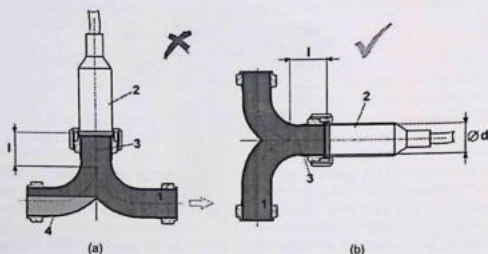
Incorrect mounting of sensors (2) in process lines (1) may give rise to tees with closed ends (3) that if too long will result in large dead areas. (a) But a swept tee if mounted in a horizontal pipeline may impede drainage (4). (b) Swept tees should be mounted in a vertical pipeline. Dimension  $l$  must be as short as possible relative to dimension  $d$ , maximum  $l = d$  (Lelieveld et al., 2003; Hauser et al., 2007).
